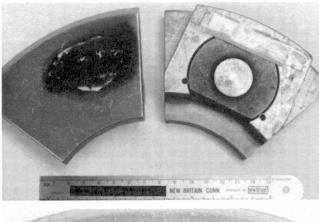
Thrust Pad from a Hot Gas Expander Turbine Suffering from Overheating (Baking) due to Synthetic Oil. This bearing had 4000 hours duty at removal.
